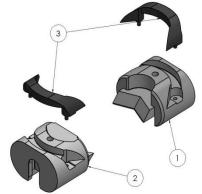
CTHU Non-Sealing Shear Rams Exploded
